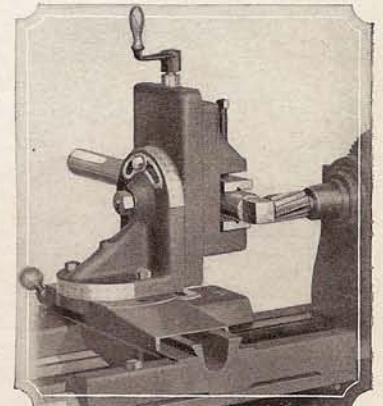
Squaring the End of a Shaft with Milling Attachment
